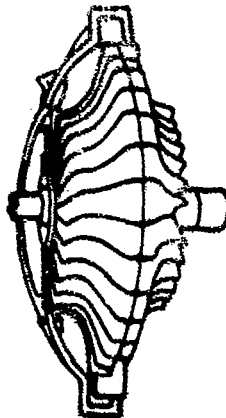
DOUBLE-ENTRY COMPRESSOR IMPELLER
